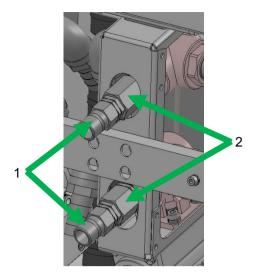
Connection stubs for connecting with mold cooling channel sockets
